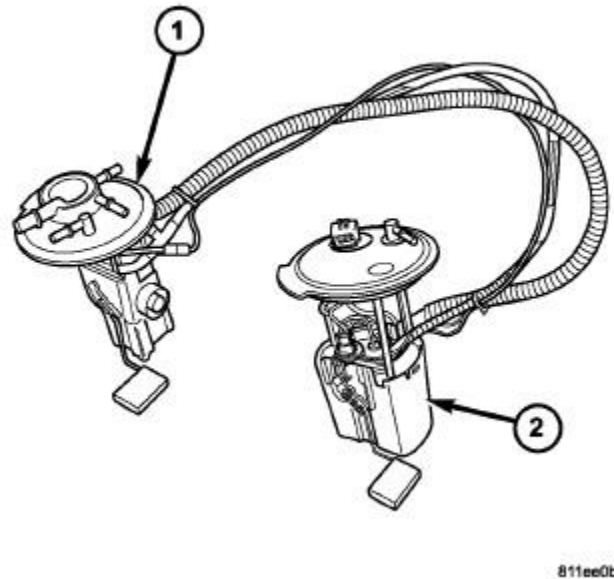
Main Fuel Pump Module & Auxiliary Fuel Pump Module
